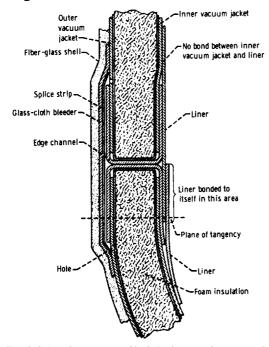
Detail of joint between cylindrical and dome sections of tank foam layer.
